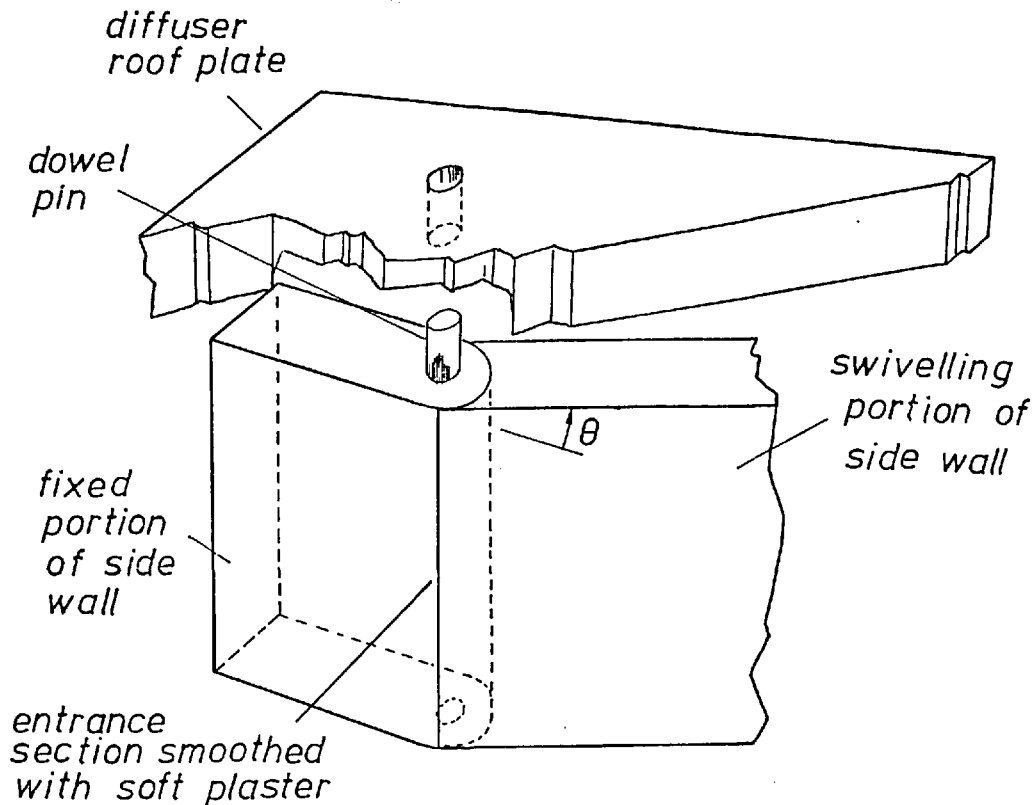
Details of arrangement for swivelling diffuser side walls.
